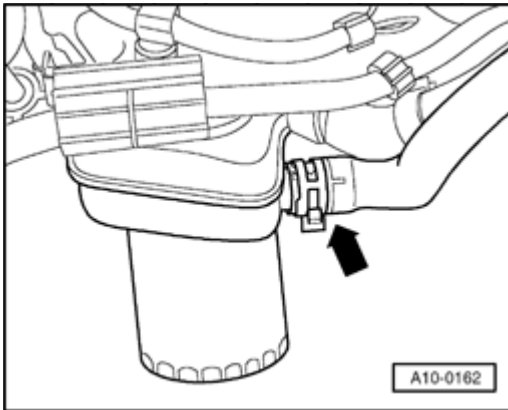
Disconnecting Bottom Coolant Hose At Oil Cooler To Drain Off Remaining Coolant
